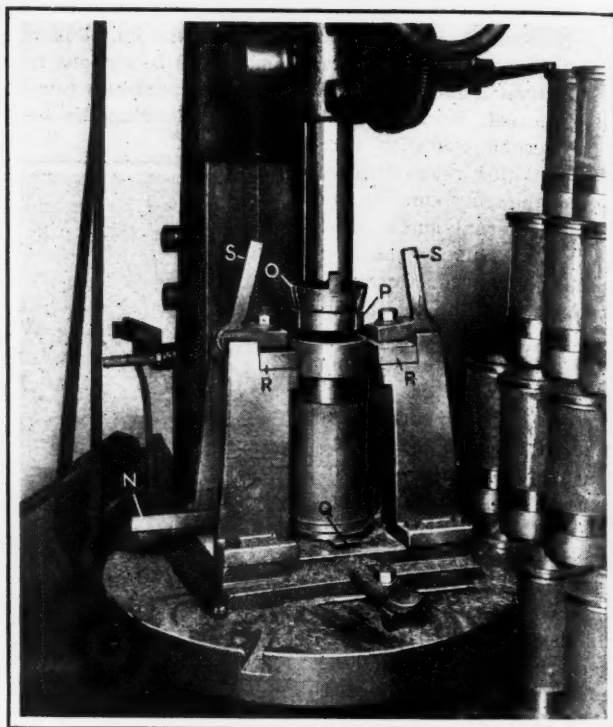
Tooling provided for taking a Chamfering Cut on Each End of the Sleeve concentrically with the Bore
